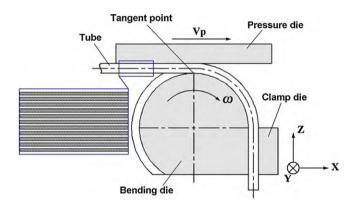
Scheme of porous microchannel flat tube rotary-draw bending process.
